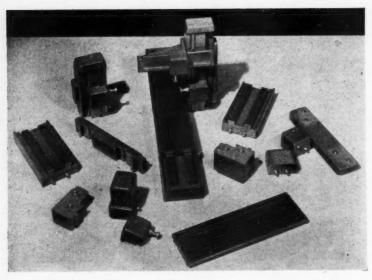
These models show the basic elements and several of the common components and assemblies from which plano-milling machines of various types can be built up
